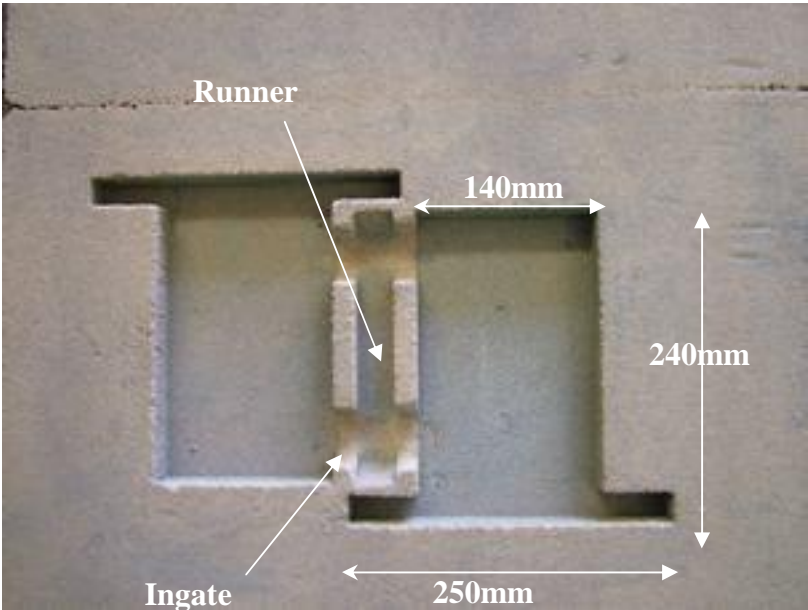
5. Photograph of the bottom mould (drag) used for sand casting anodes (first design)
